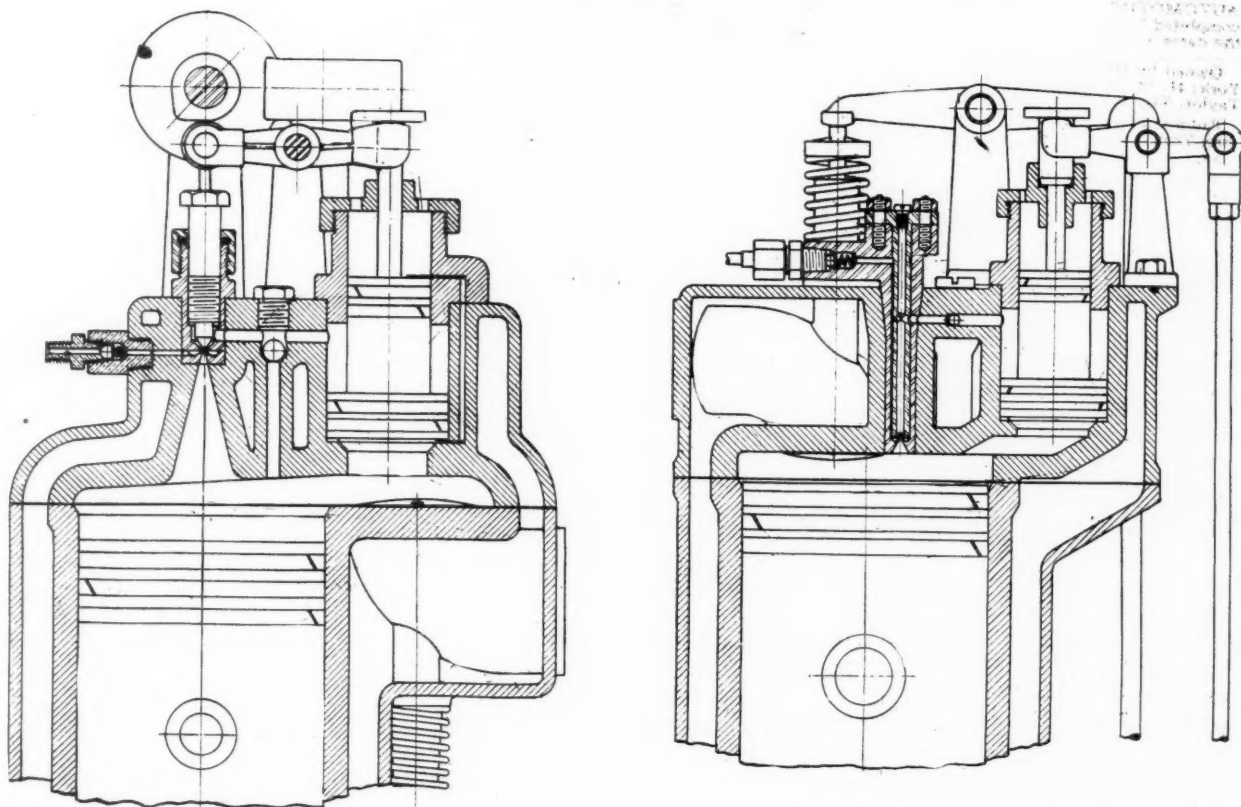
shows a possible application of the injector to a four-cycle L-head motor, and Fig. 4 shows it in connection with a valve-in-head type.
